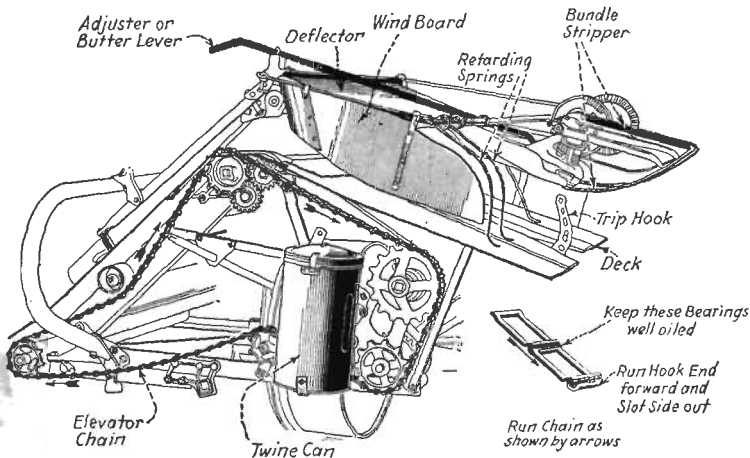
Elevator chain, deflector, adjuster lever, and bundle stripper.
